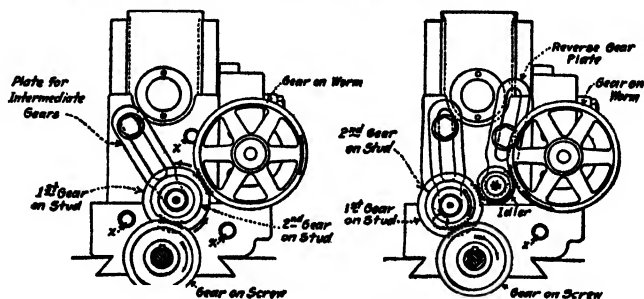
Brown & Sharpe change gears arranged (a) for right-hand spiral, and (b) with idler introduced for cutting left-hand spiral.
